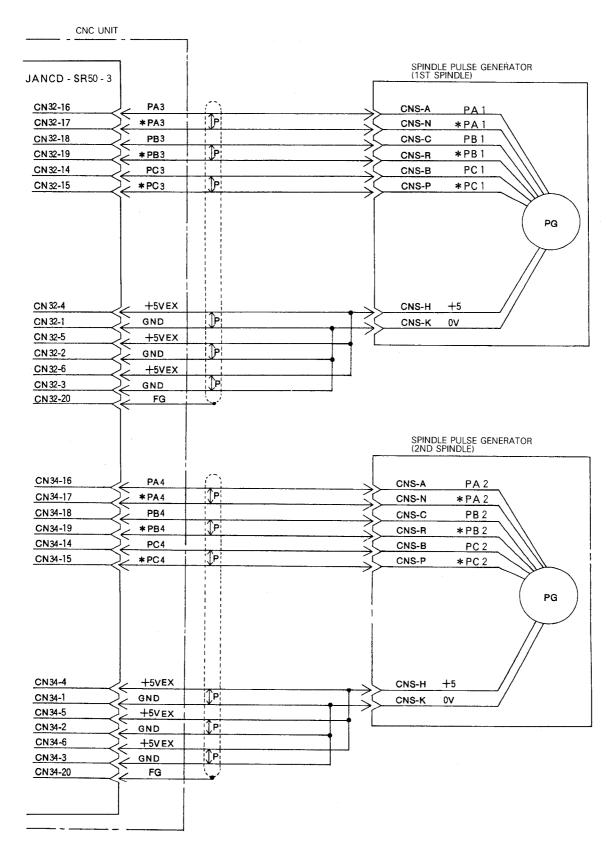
Connection to Motor with Separately Installed PG (1st Spindle, 2nd Spindle)
